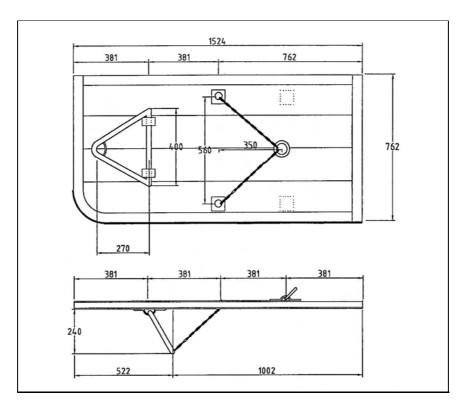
Design details of flat rectangular otter board of wood and steel construction (1524x762 mm; 75 kg)
